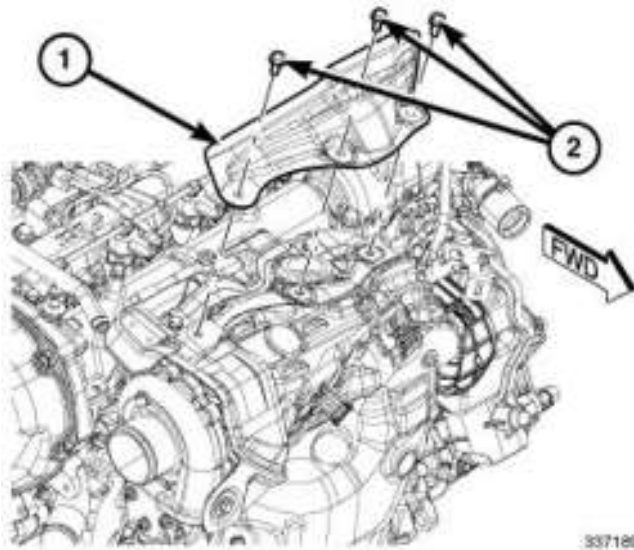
Upper Turbocharger Heat Shield & Mid Upper Turbocharger Heat Shield
